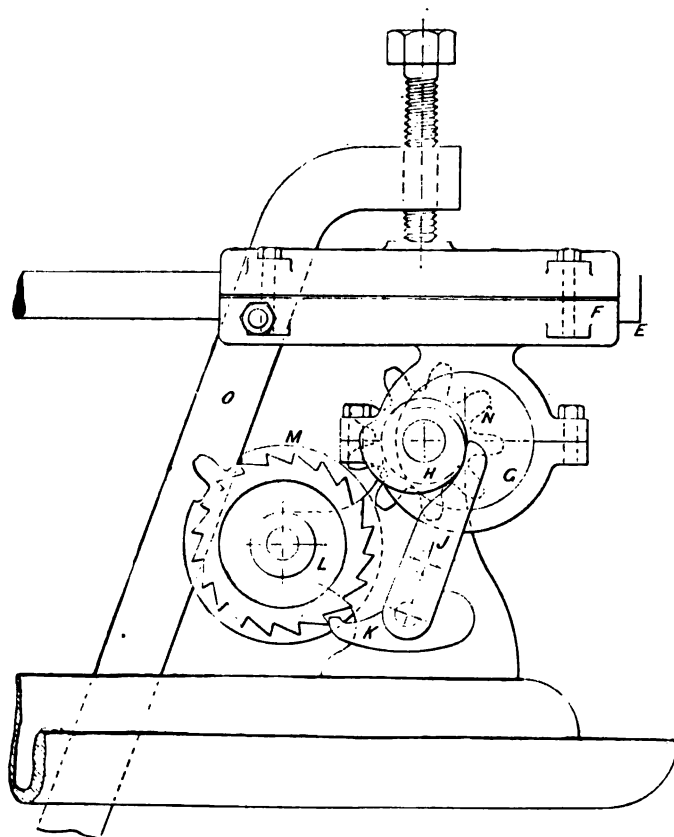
Detail of Eccentric Motion of Hack-Saw Machine.
